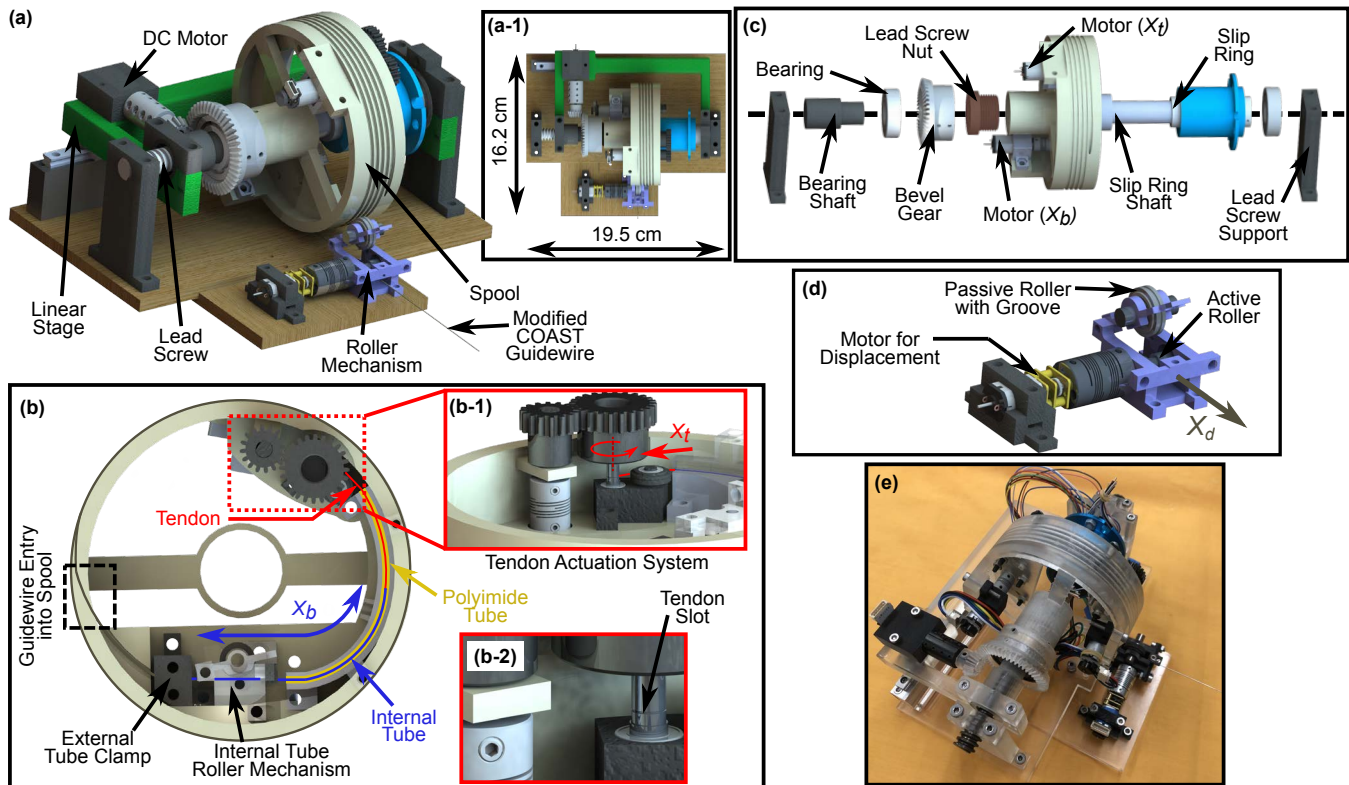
The compact guidewire advancement mechanism shown with an: (a) Assembled view and (a-1) Top view of mechanism; (b) Components within the spool mechanism for guidewire tip actuation showing internal tube roller mechanism to control X_b , and (b-1) Tendon actuation system to control X_t with (b-2) Close up view of tendon slot for fixed attachment; (c) Exploded view of components mounted onto the lead screw; (d) Assembly of roller mechanism for feeding the guidewire X_d ; (e) Final build of the compact guidewire advancement mechanism.
